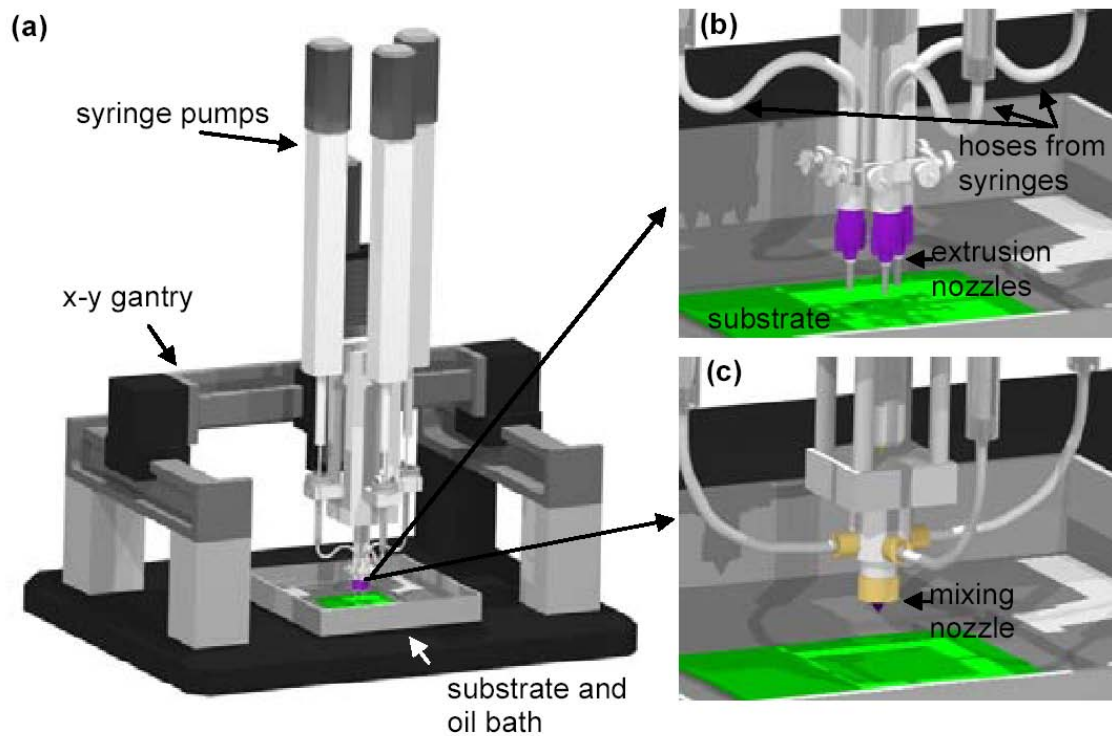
Schematic illustrations of multi-ink printing: a) the robotic gantry system used by robocasting, b) the arrayed nozzle assembly for serial extrusion, and c) the mixing nozzle assembly for parallel extrusion.<sup>32</sup>
